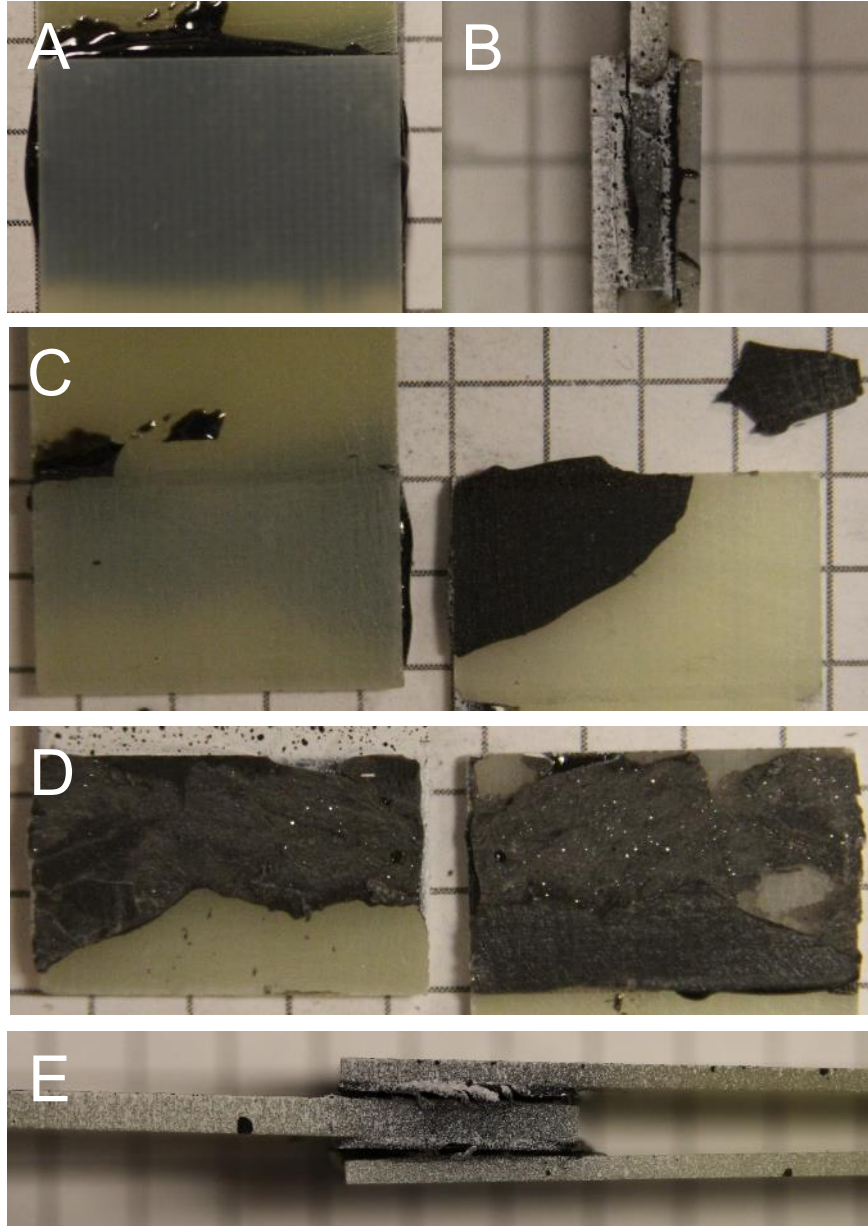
Specimen photos of gage region for JB Kwik KwikWeld (JBQ). (A) Back side of specimen JBQ-3 before testing. (B) Right side of specimen JBQ-2 before testing. (C) Back side of JBQ-3 after testing. (D) Front side of JBQ-3 after testing. (E) Left side of JBQ-2 after testing.
